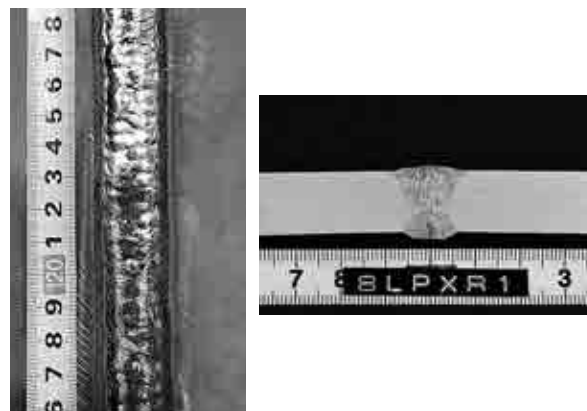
Bead appearance and macrostructure of DW-308LP-XR butt joint weld metal (3G upward position)
